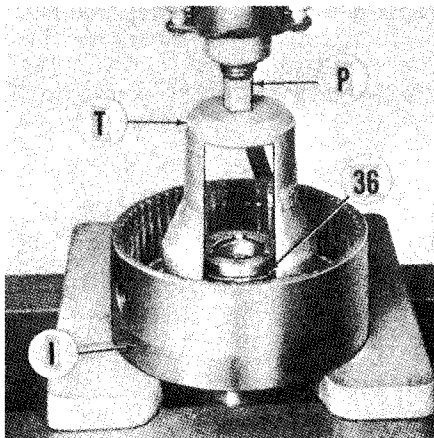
Using Ford tool No. 1312 to compress piston return spring (43—Fig. 197 or 198), so snap ring (36) can be removed.
